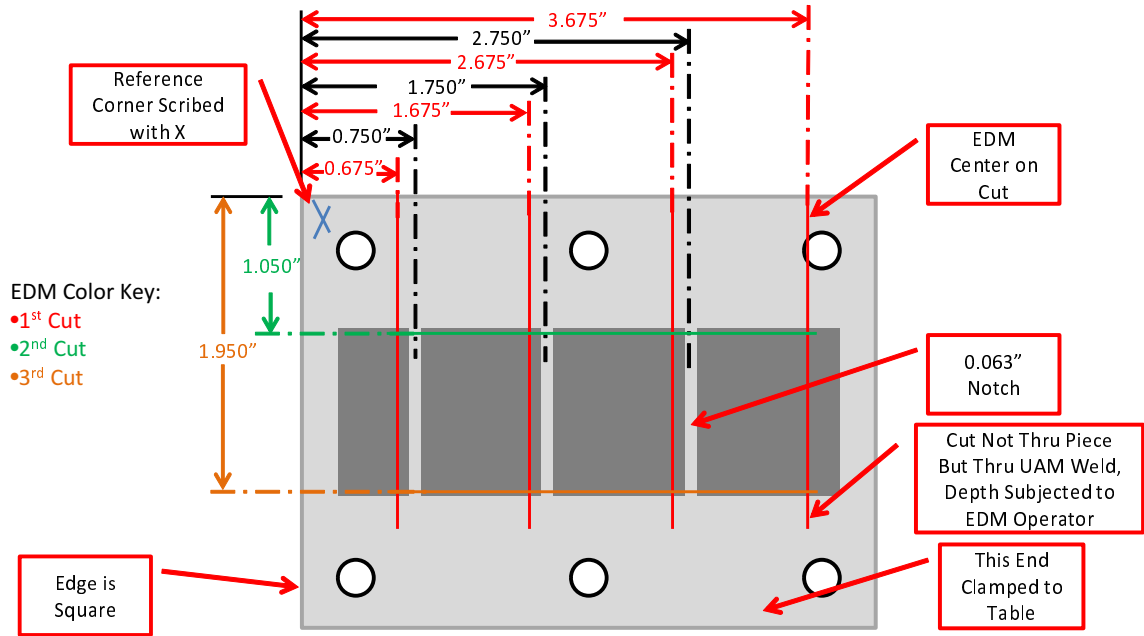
Drawing of wire EDM cutting passes and dimensions. These cutting passes were selected to minimize stress on samples. This cutting path may not be optimal for reducing stress or for reducing EDM cutting time.
